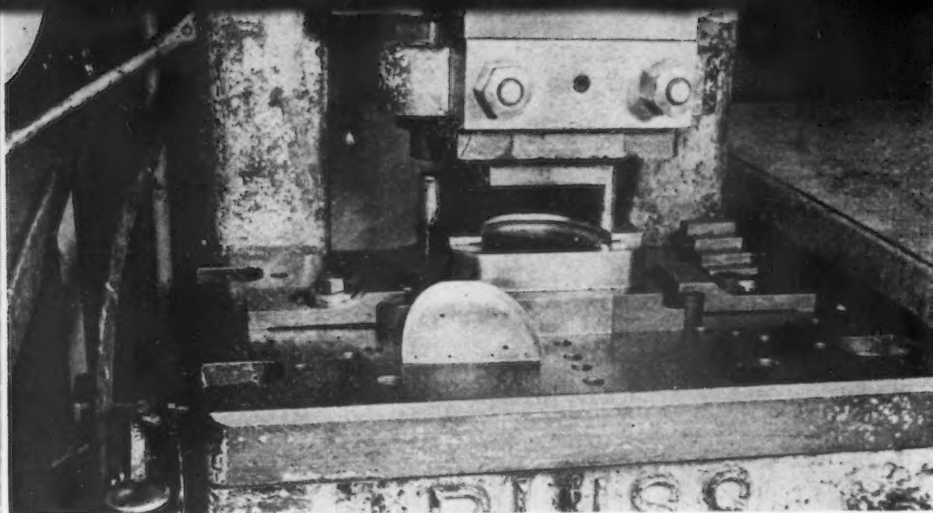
This is a typical punch press forming die and a hot formed magnesium part.
